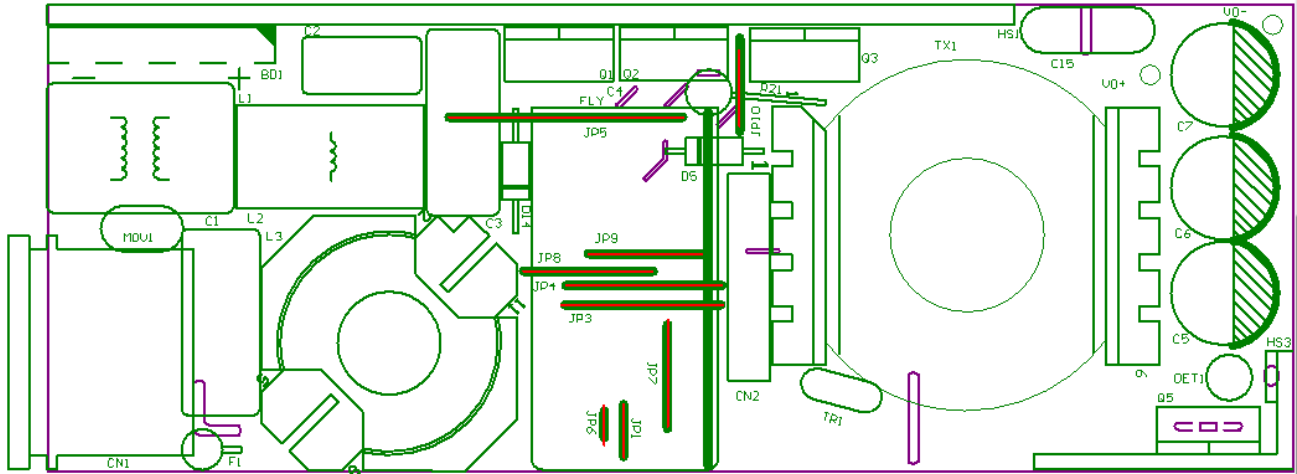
Evaluation Board Layout (Mother Board), Top Overlay
